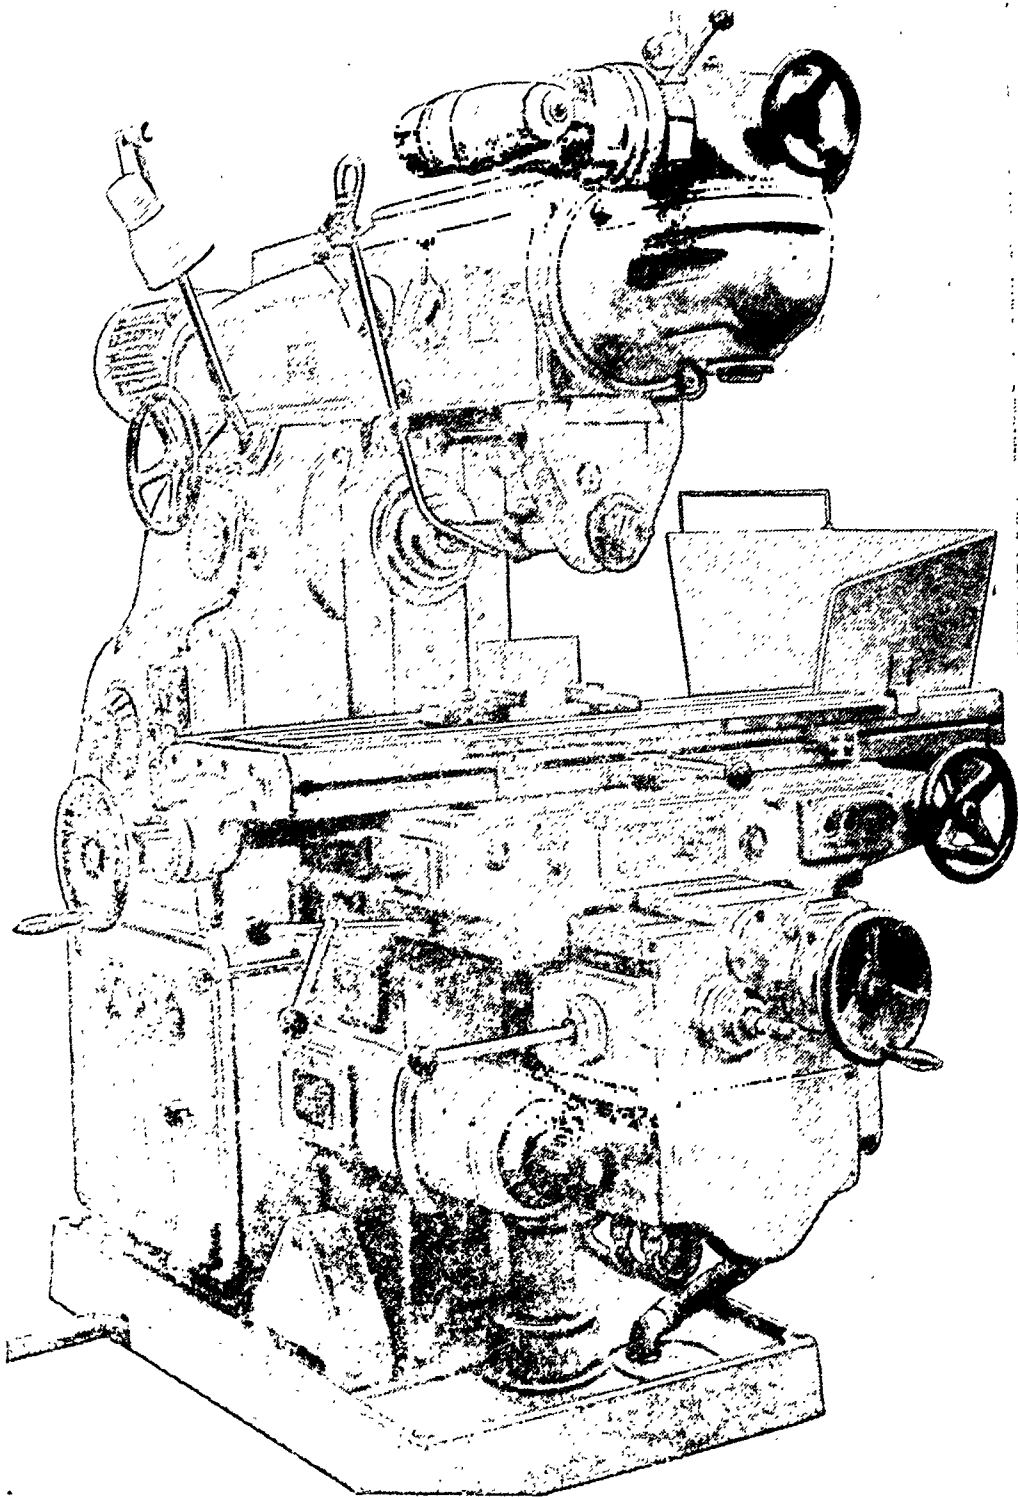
Ram-head knee-type milling machine, model 6M82III
